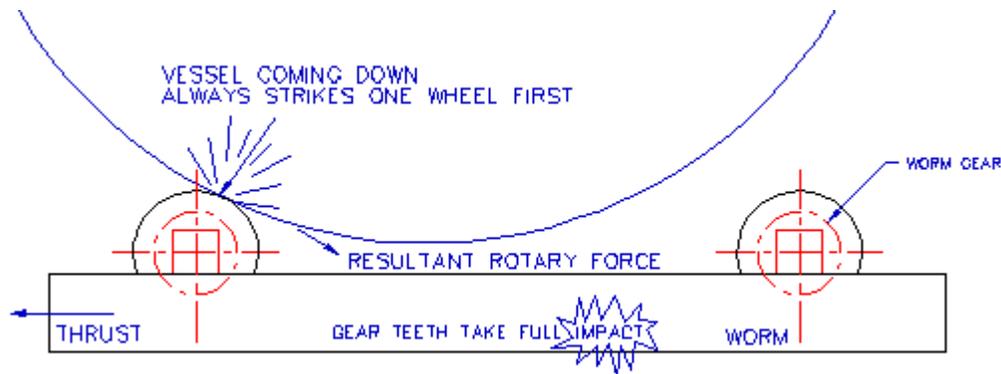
WHEN LOADING THE VESSEL, IT ALWAYS STRIKES ONE WHEEL FIRST
